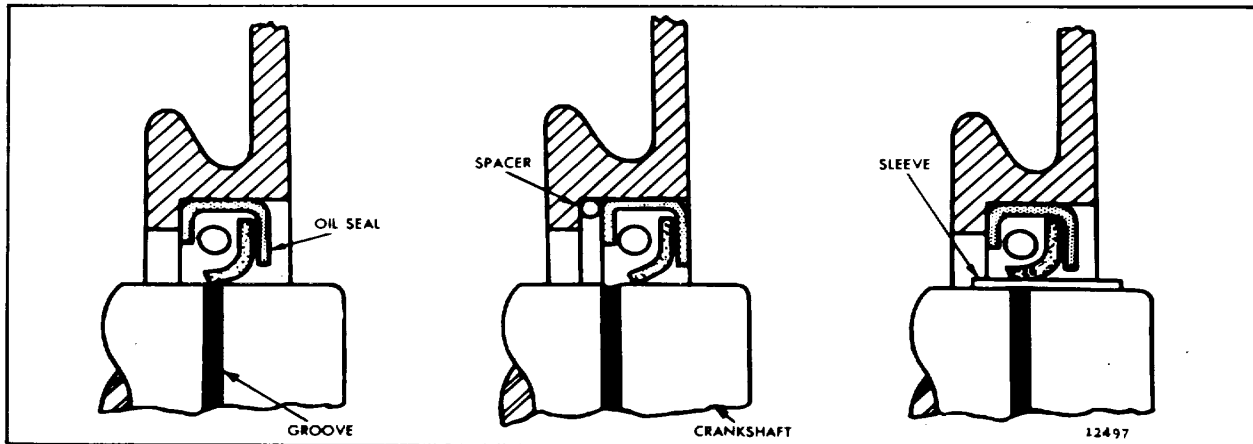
Use of Rear Oil Seal Spacer or Sleeve on Grooved Crankshaft
